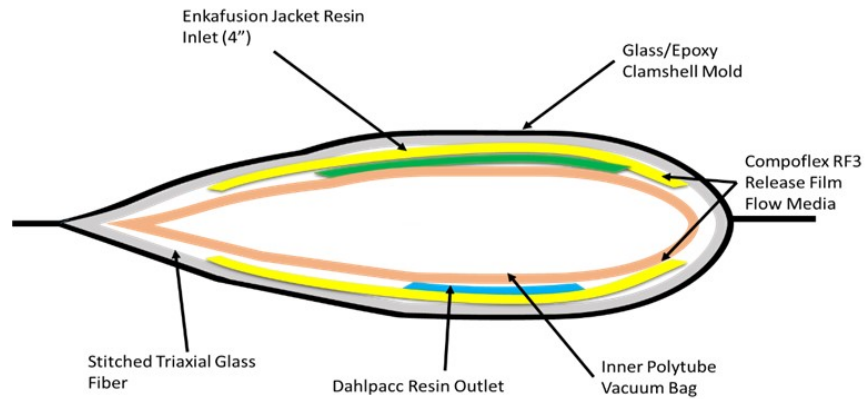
Schematic of materials stack-up in the assembled mold halves.
